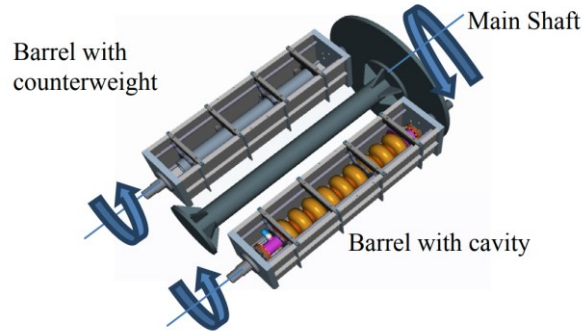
A scheme of the CBP machining of a 9-cell Tesla – type cavity [95]
